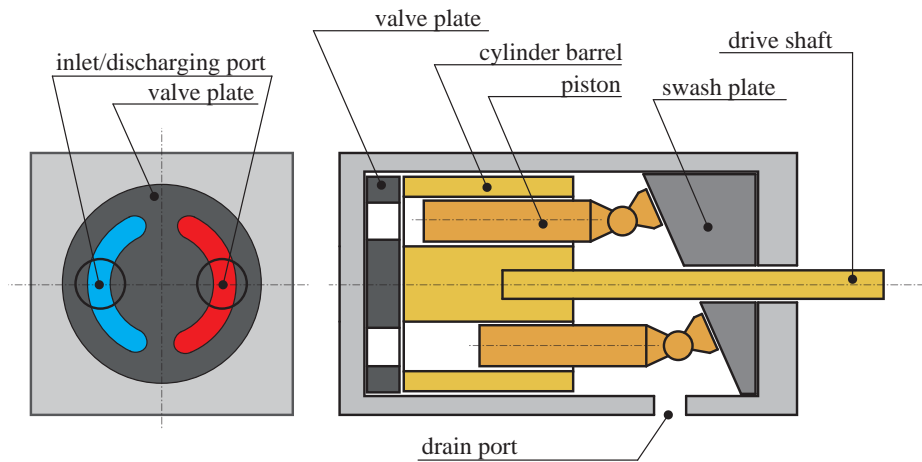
Schematic of a valve plate type axial piston pump. Rotational mechanical input into the pump is converted to prismatic piston motion by a swash plate. The valve plate rectifies the reciprocating motion of pistons into a single direction of flow. The valve plate is fixed on the pump casing and the cylinder barrel rotates with the input shaft, therefore the cylinders are automatically connected to the proper (inlet or discharging) port according to its phase.
